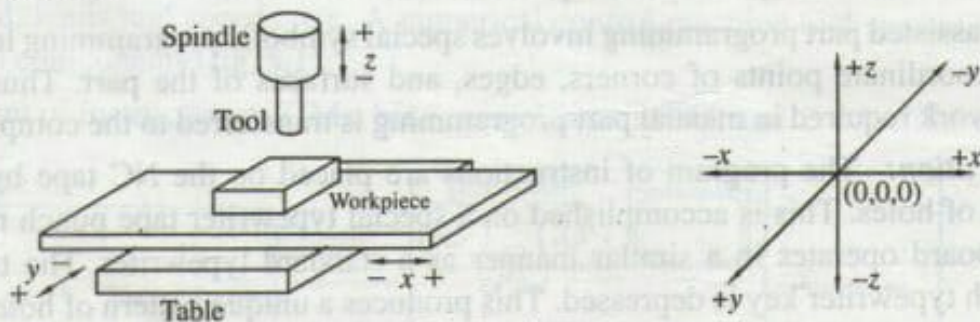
Machining center (vertical milling machine) axis orientation
